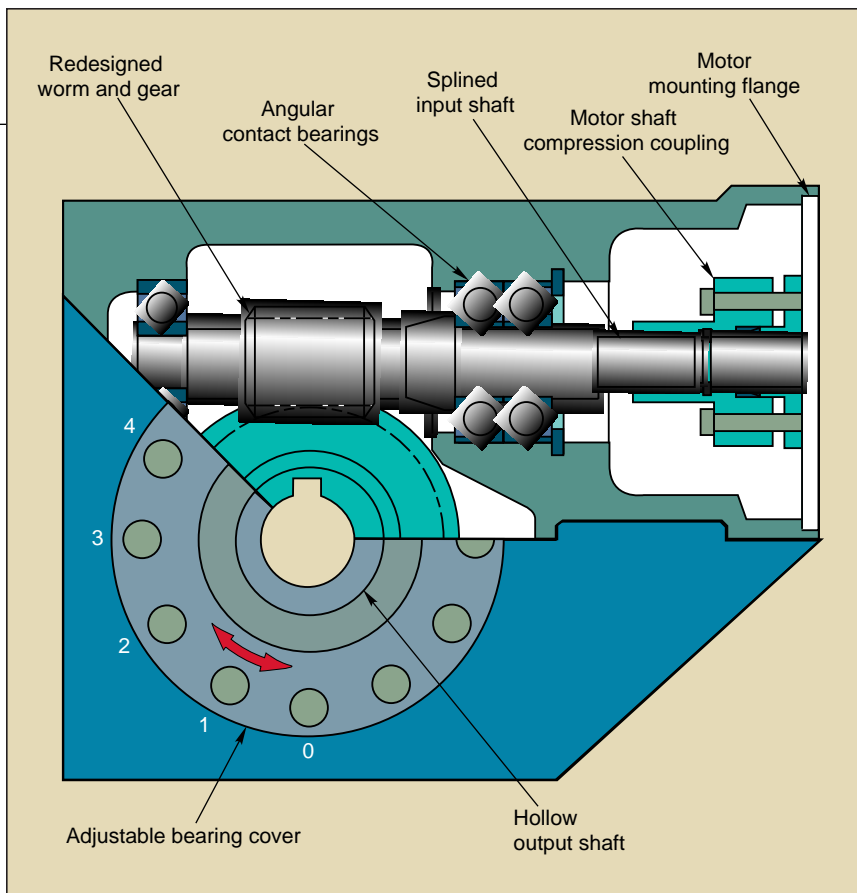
To reduce backlash, new gearhead combines improved gear tooth profiles, adjustable eccentric bearing covers, and precision angular contact bearings. Other features include an input mounting flange for most servomotor types and a hollow output shaft to accommodate various driven load connections.
